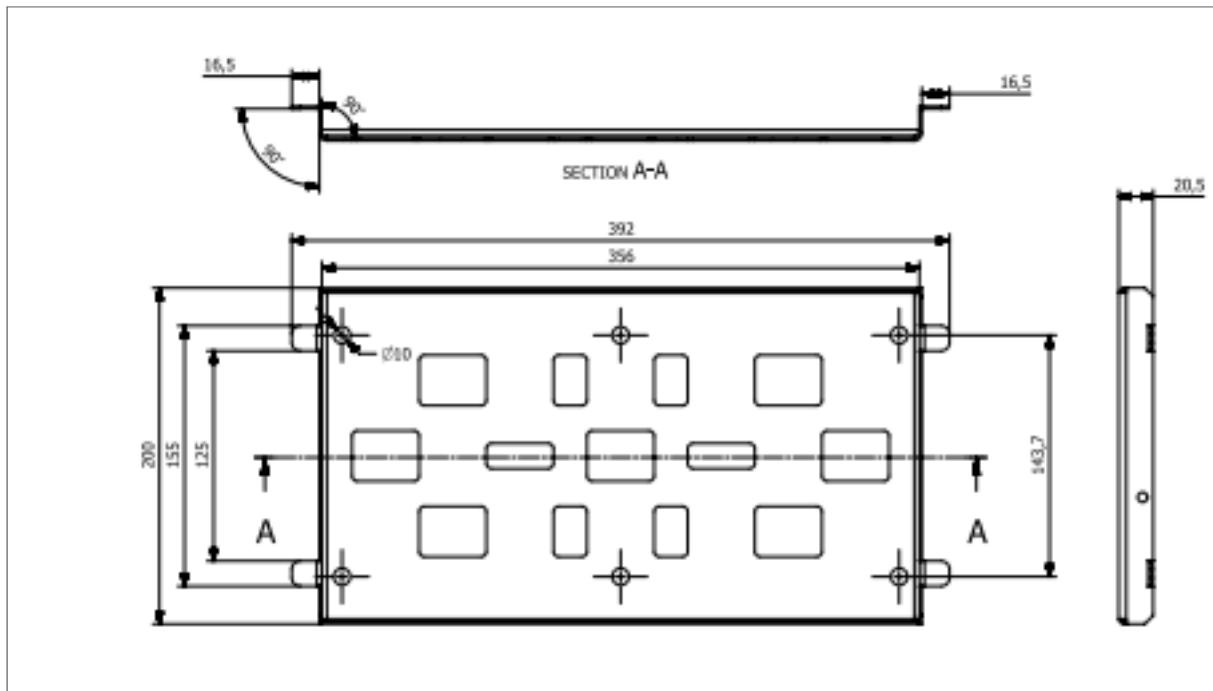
Wall-mounting bracket dimensions (3-12kW) models
